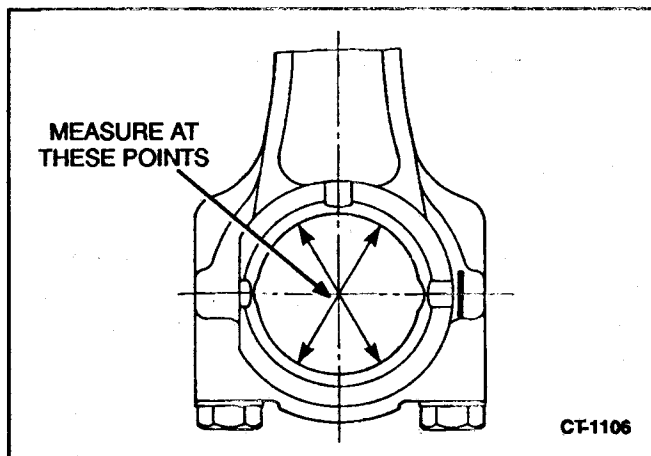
MEASURING CONNECTING ROD LARGE END
